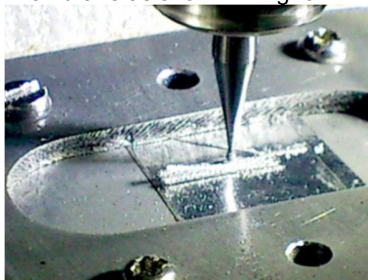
Fixture Design for sandwiching the nickel membranes by two aluminum flat plates
